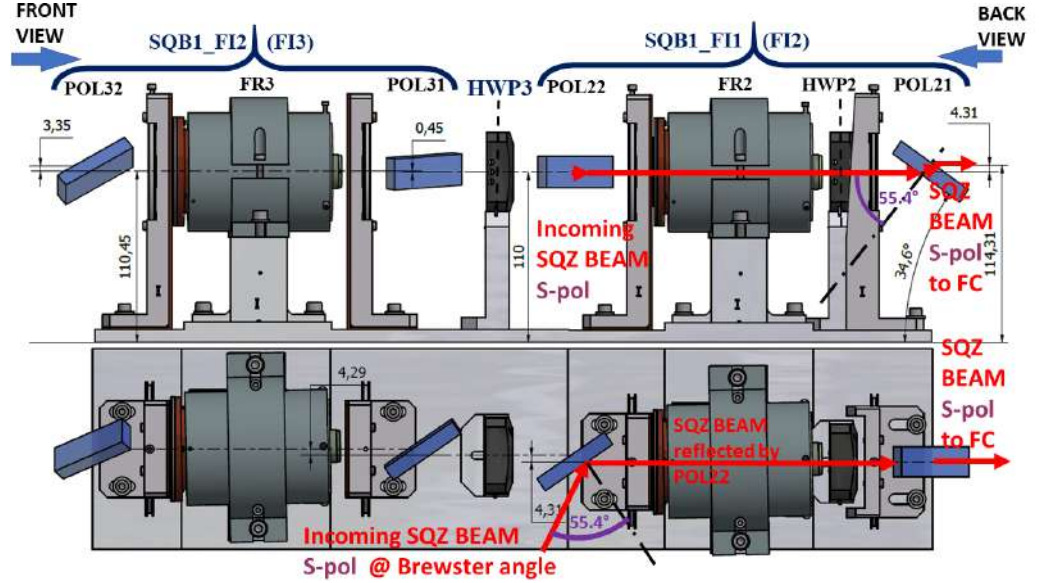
CAD drawing: side view (upper figure) and top view (lower figure) of the double FI on suspended in vacuum squeezing bench. Squeezing beam arrives from right side of the output polarizer (POL22) of FI2 and hits the coated surface of POL22 with angle of incidence equal to the Brewster angle of the fused silica (55.4°). The beam is then reflected by POL22, travels inside FI2, and goes towards the filter cavity (FC) with the correct S-polarization. Credits T. Zelenova
